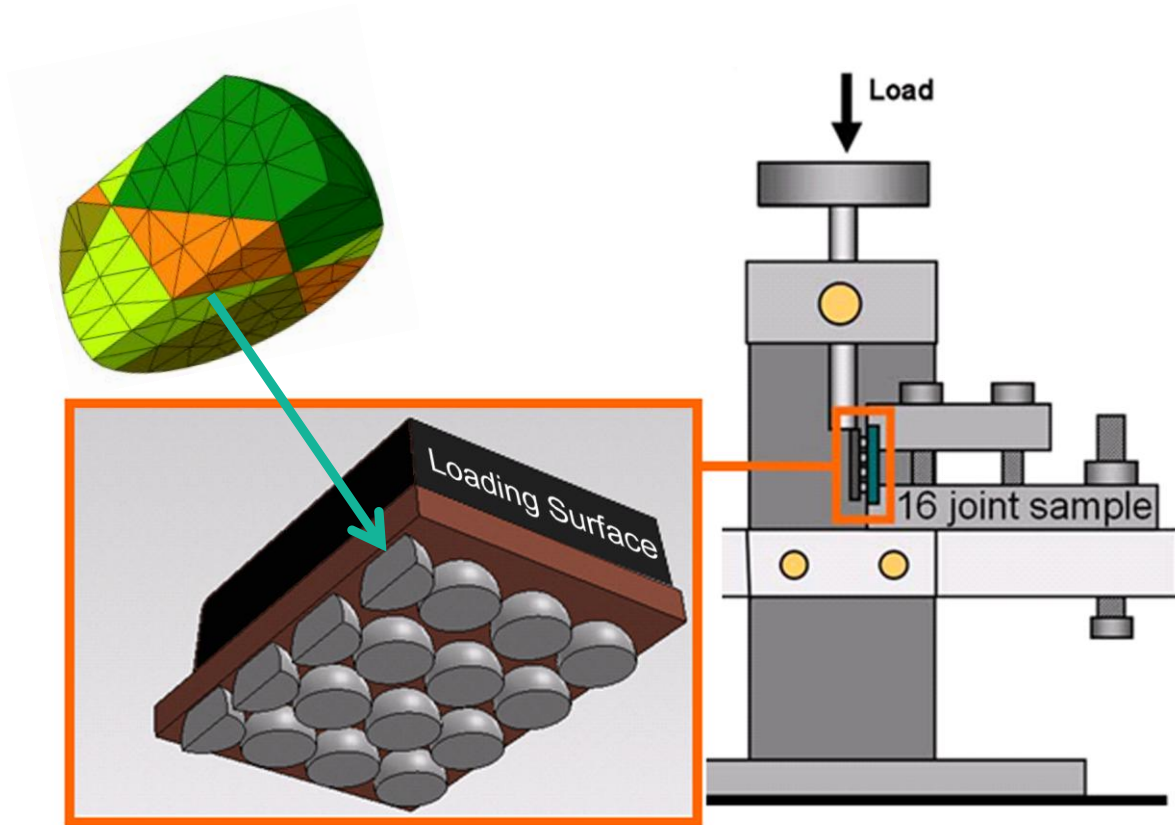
Schematic diagrams of a 3-D visualization of the CPFE mesh located in a 4×4 solder joint array sectioned from a PBGA package. The solder ball assembly geometry and shear test apparatus is also shown.
